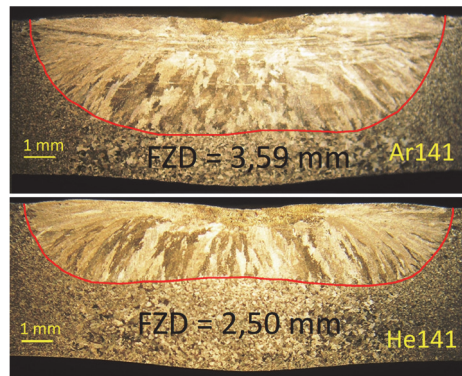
Penetration profiles and fusion zone depths for argon and helium weld root side shielding (welding time 14s)
